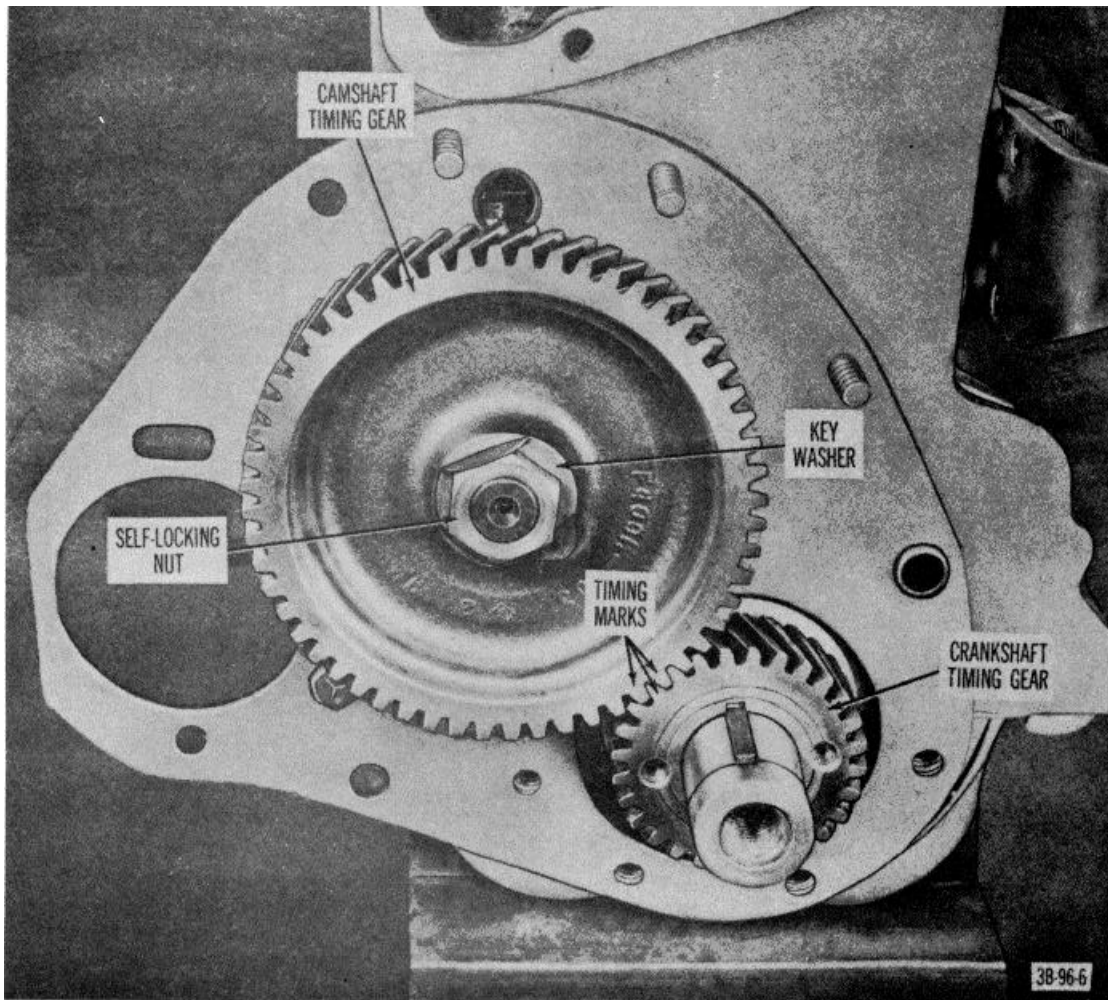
Crankshaft and camshaft timing gears, showing correct alignment of timing marks.
